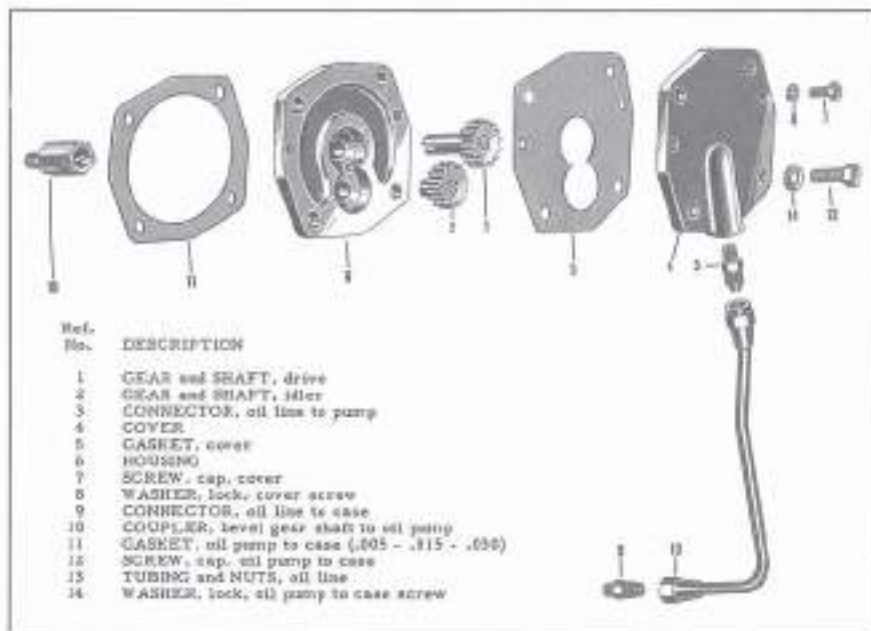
Transmission Oil Pump (Lone Model) - Exploded View
